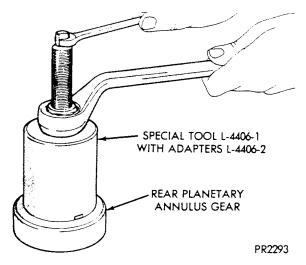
Remove Rear Planetary Annulus Gear Bearing Cone
